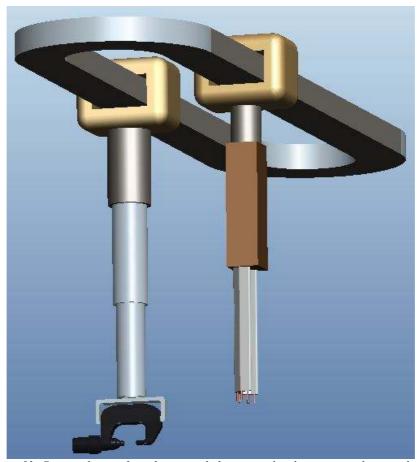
Concept design of a rail crane with the rivet tool and screwing tool mounted on it.
